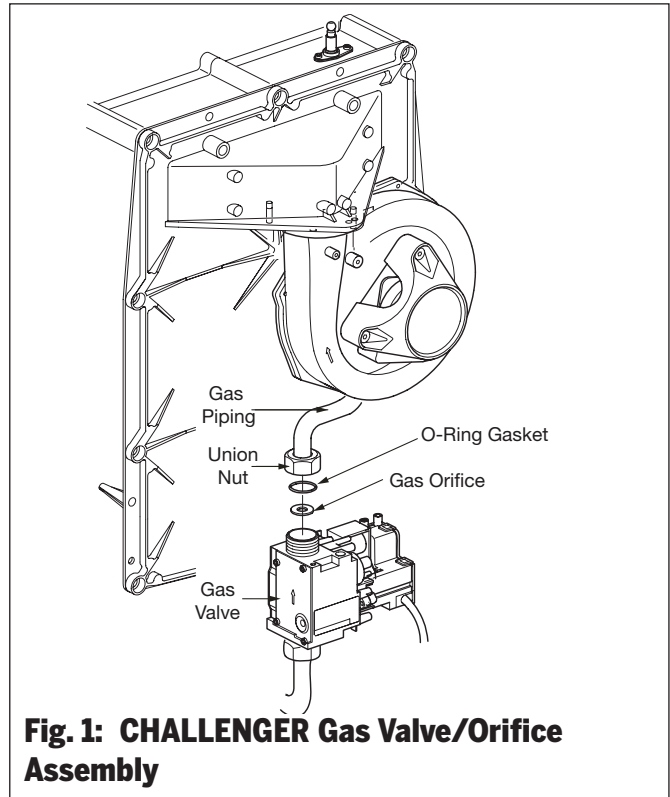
CHALLENGER Gas Valve/Orifice Assembly
